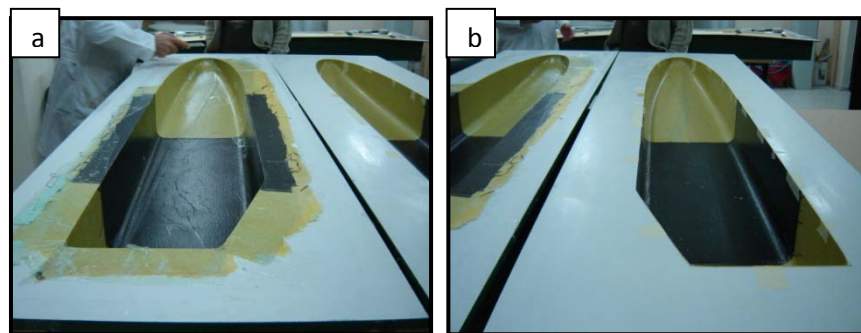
Cured fuselage skin inside the mold (a), Trimmed fuselage skin (b)
